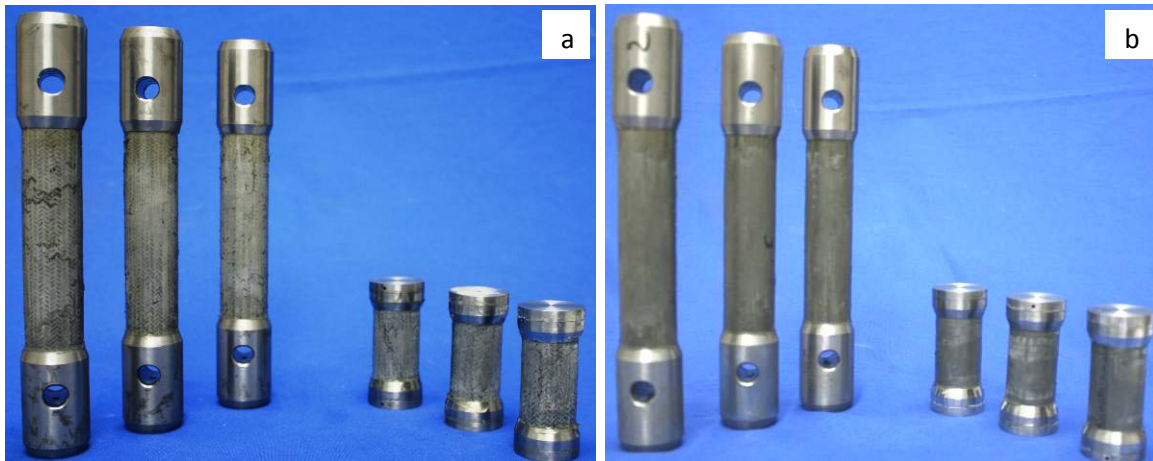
Tension (10" long) and compression (3.5" long) specimens with end fixtures attached: a) Al-W-Ep; b) Al-Hf-W-Ep.
